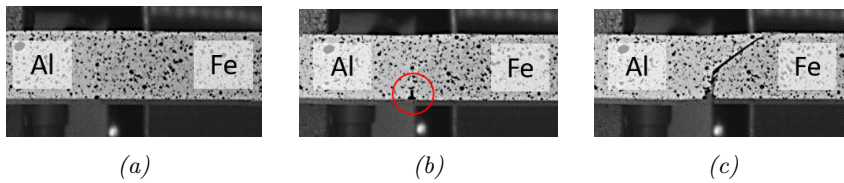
Fracture propagation of specimen 2 at different stages during tensile testing; (a) before loading, (b) at the point of crack initiation and (c) final fracture.
